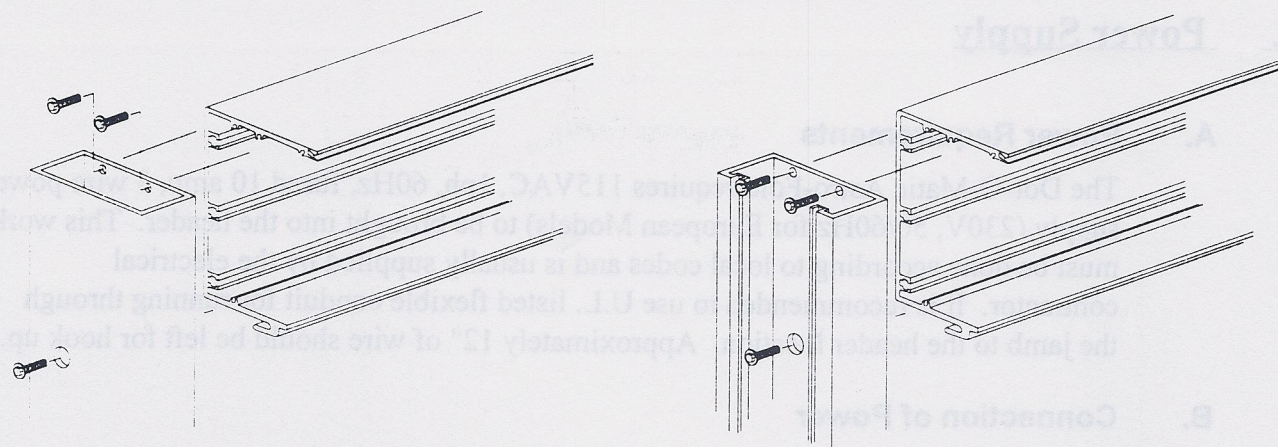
Attaching 1-piece and 2-piece jamb tubes to the header.
